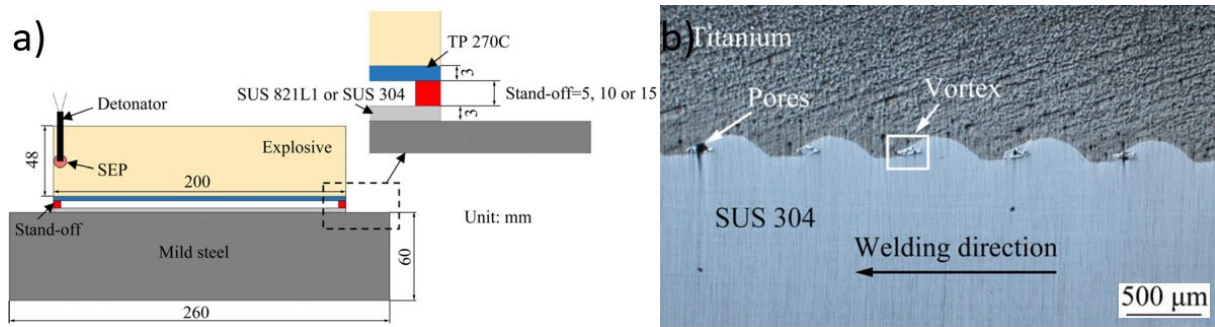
a) Schematic of explosive welding configuration. b) Typical interface formed in explosive welding.
